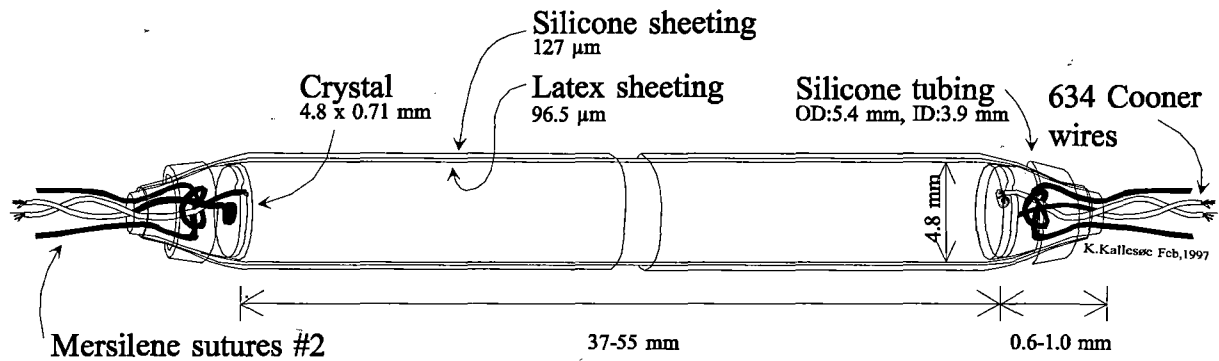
Final Type 2 length gauge design, including the double layer shell.
